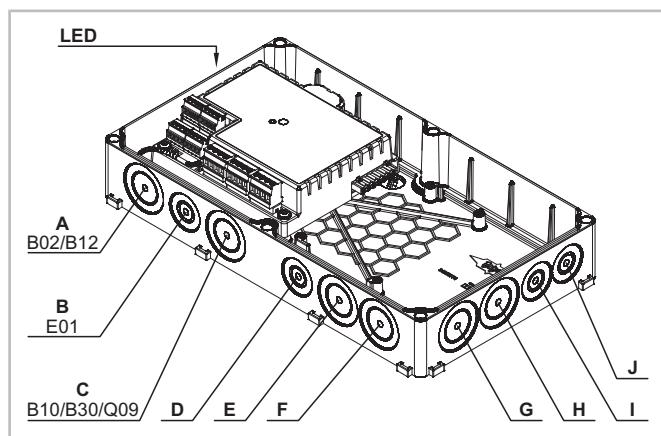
Assignment of the cable bushings into module housing for compressors of housing size 5 and 6, smaller housing sizes similar.
